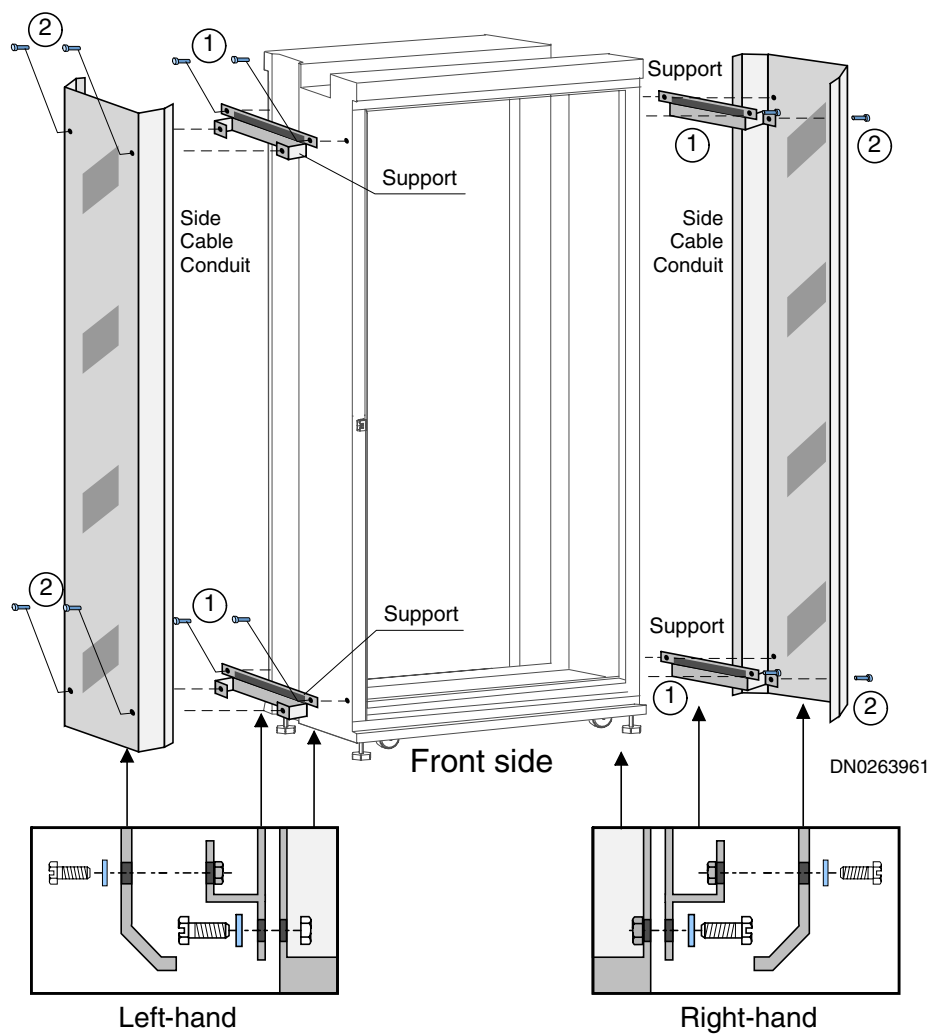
Installing the Side Cable Conduit SCC at either side of the BSCC cabinet.
